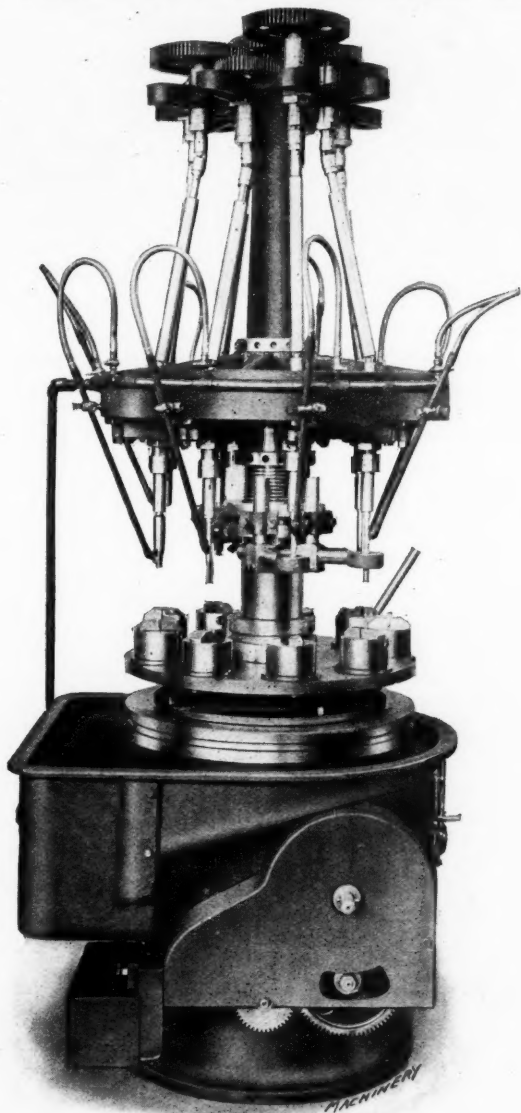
Side View of Gridley Automatic Multiple-spindle Drill
